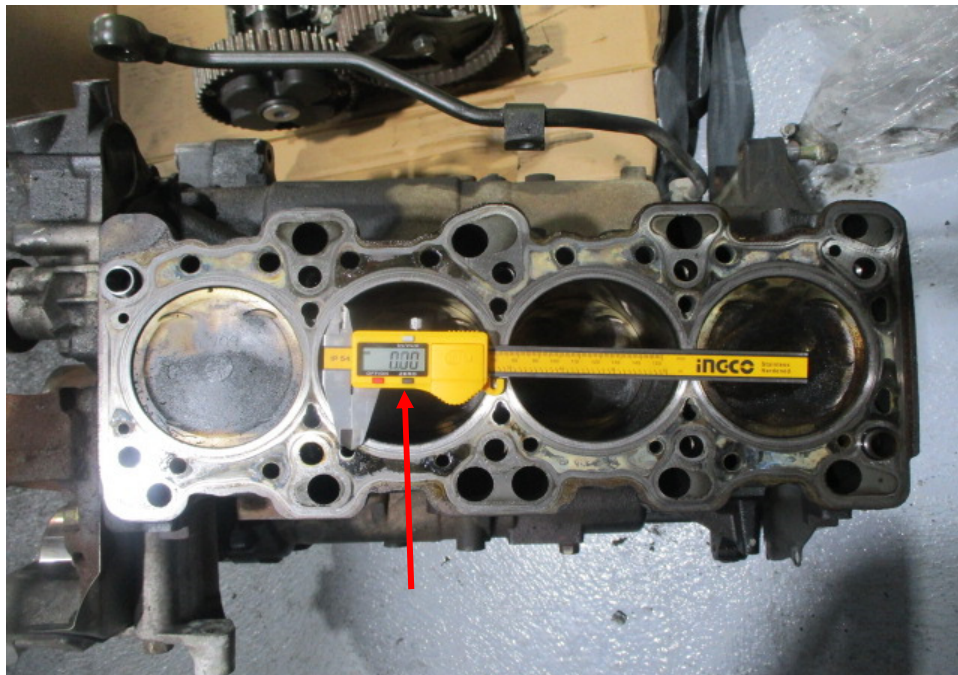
shows the bottom block of the Mitsubishi engine and the digital Vernier Caliper (arrowed) that was used to measure the bore and stroke measurements of each cylinder, which typically can be used to determine the engine displacement or more commonly referred to as engine cc. The digital Vernier Caliper was calibrated before the start of the measurements.
